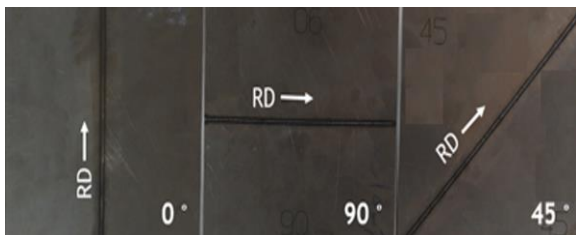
Three TWBs samples, the weld line is in rolling direction, perpendicular and with 45° to rolling direction
